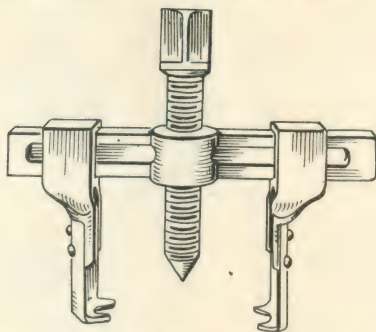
MAGNETO SPROCKET WITHDRAWAL TOOL
